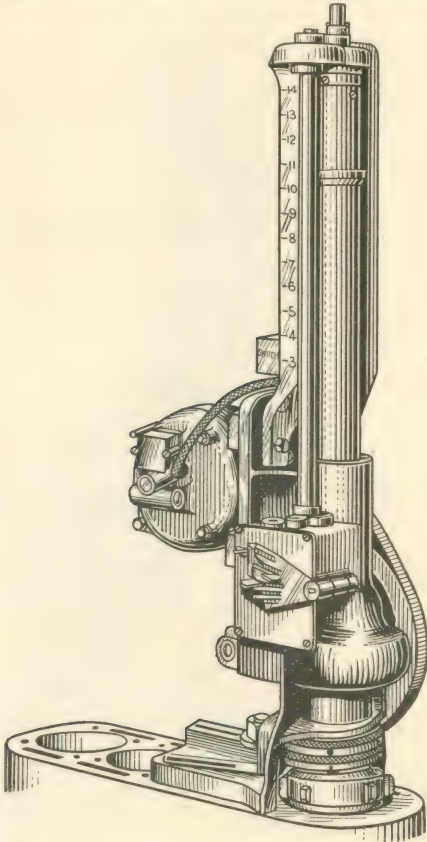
THE HALLS CYLINDER BORING MACHINE
